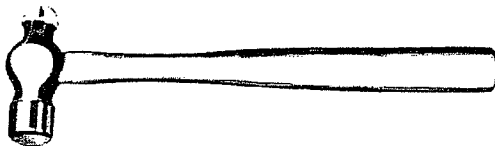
A ball peen hammer is used to drive punches and chisels. (Snap-On Tools Corporation)
